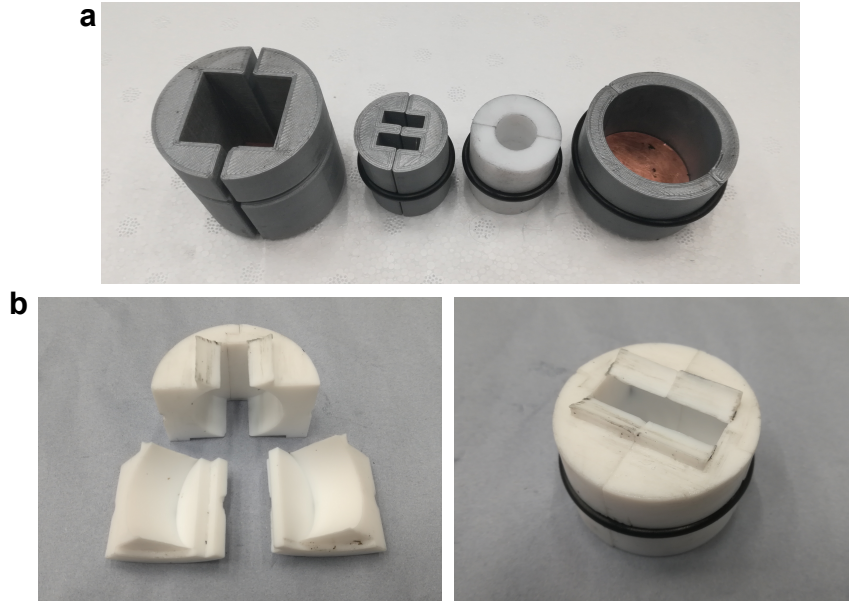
a) Various Teflon and PLA mould concepts for freeze-casting. b) Improved 4-piece Teflon mould to produce cylindrical 30 mm aerogels with a perpendicular axis of revolution.
